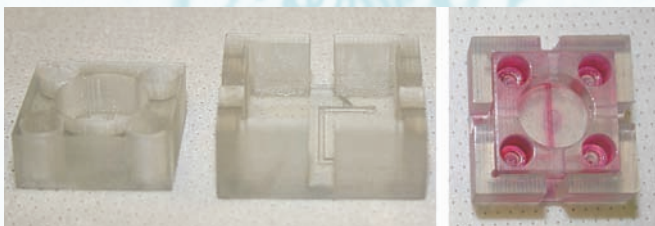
(a) Jigs with fluidic channels that form a 3-dimensional fluidic device when assembled. (b) A dye highlights the fluidic portion in the assembled one.
